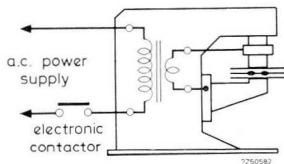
Simplified drawing of pneumatically-operated, press type projection welding machine.
